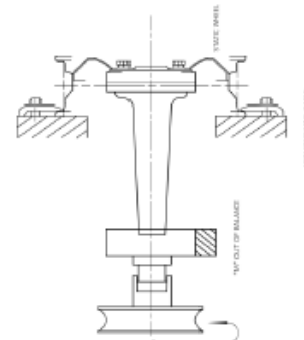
Contour setup of dynamic cornering fatigue testing machine.
